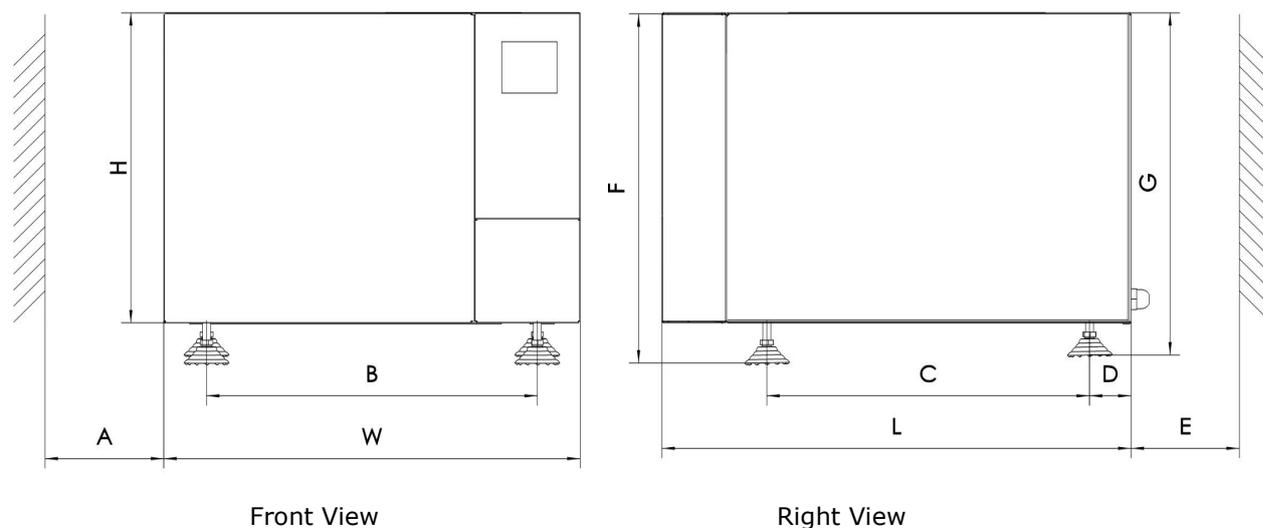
Equipment Outline Dimensions And Installation Distance Diagram
